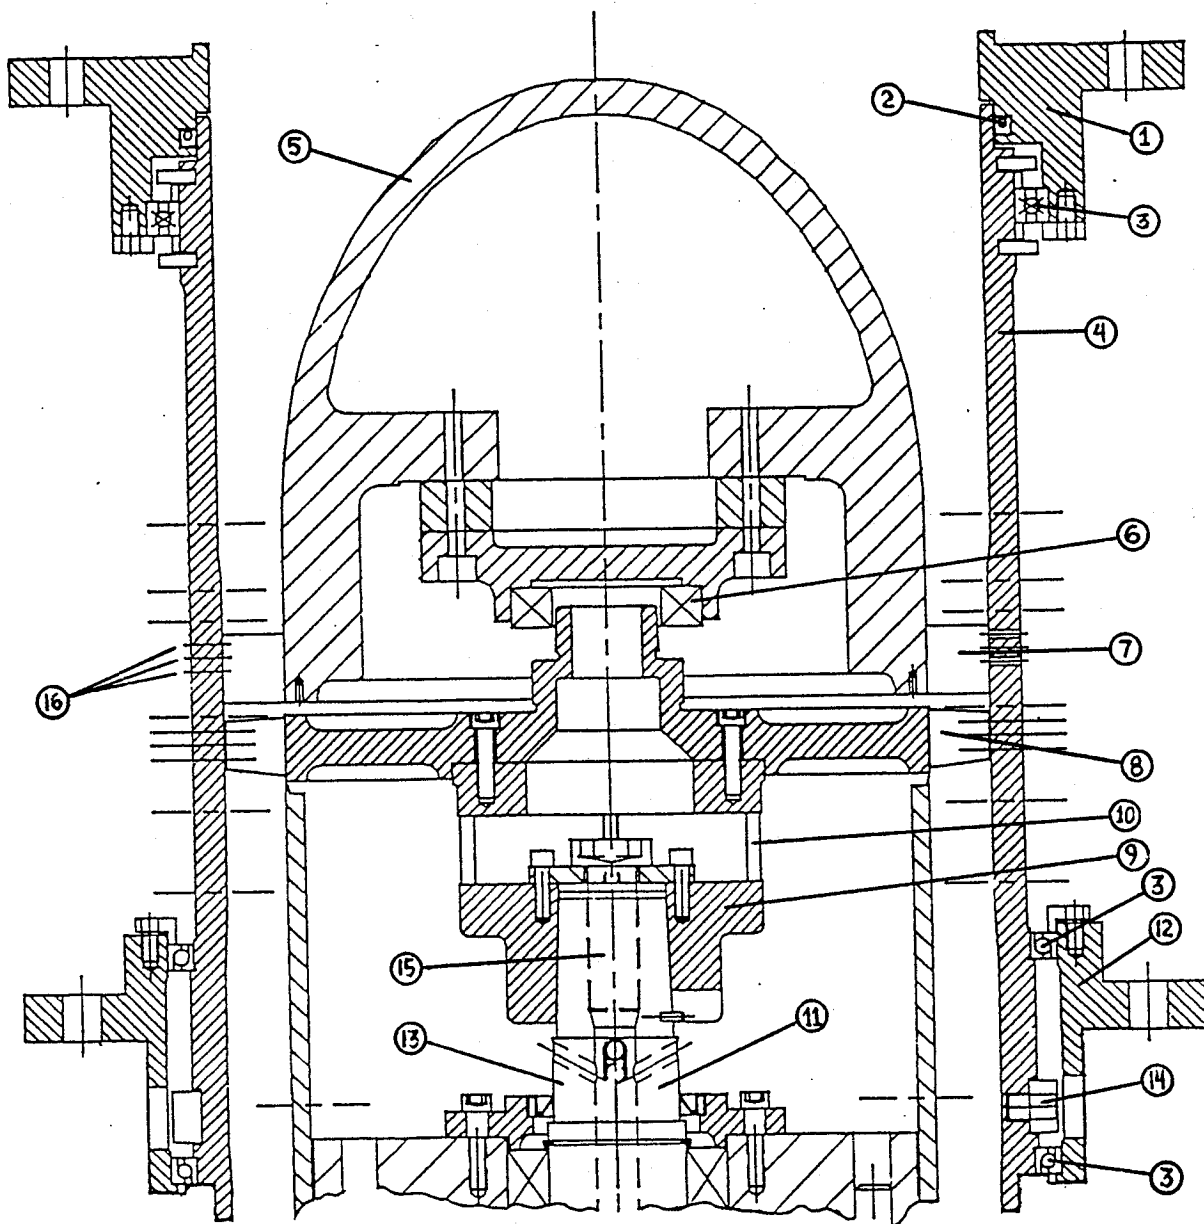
Turbine test section, upper section. (1) Upper flange, (2) Rotatable easing seal, (3) Rotatable casing bearing, (4) Rotatable casing, (5) Ogive, (6) Electrically insulated snubber bearing, (7) Stator blades, (8) Rotor, (9) Rotating dynamometer, (10) Square posts where strain gauges are attached, (11) Upper drive shaft, (12) Lower flange, (13) Location of upper torque strain gauge bridge, (14) Chain for rotating casing, (15) Hollow shaft for instrumentation wires, (16) Three axial locations for stator retaining screws
